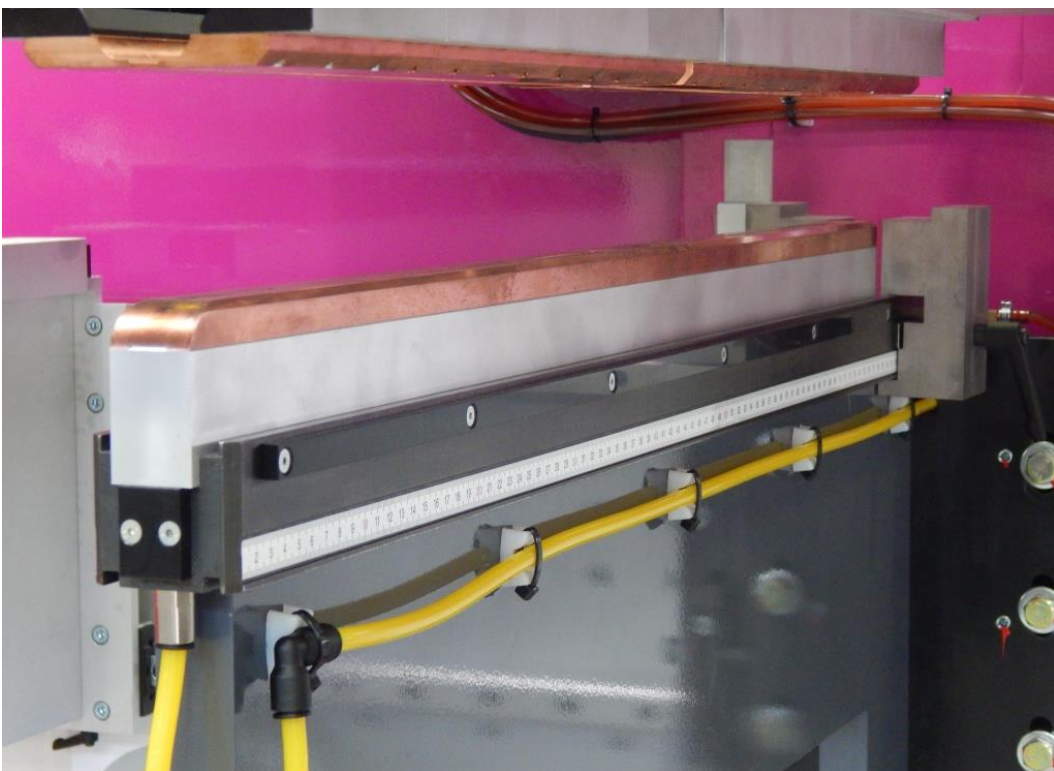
Narrow mandrel with CuCrZr backing bar, cooling and part stop.
